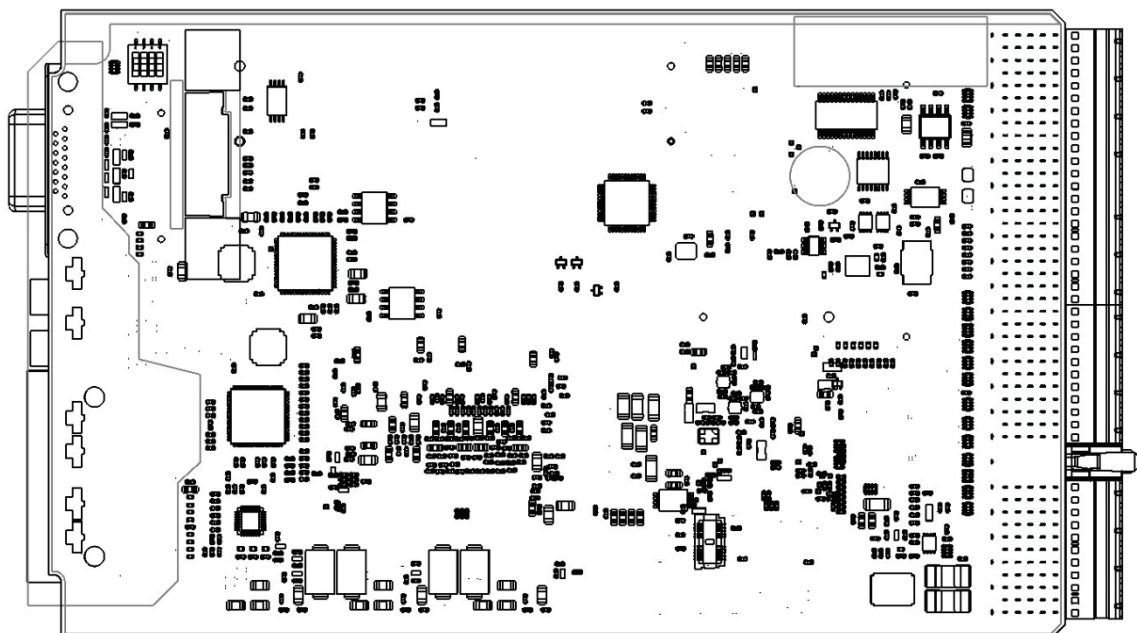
4HP CP3005-SA Board Layout (Bottom View)
